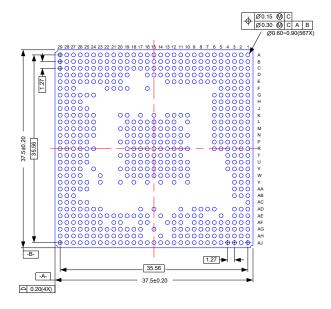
Mechanical Specifications - 567-Pin HSBGA Ball Grid Array Package with Heat Spreader
